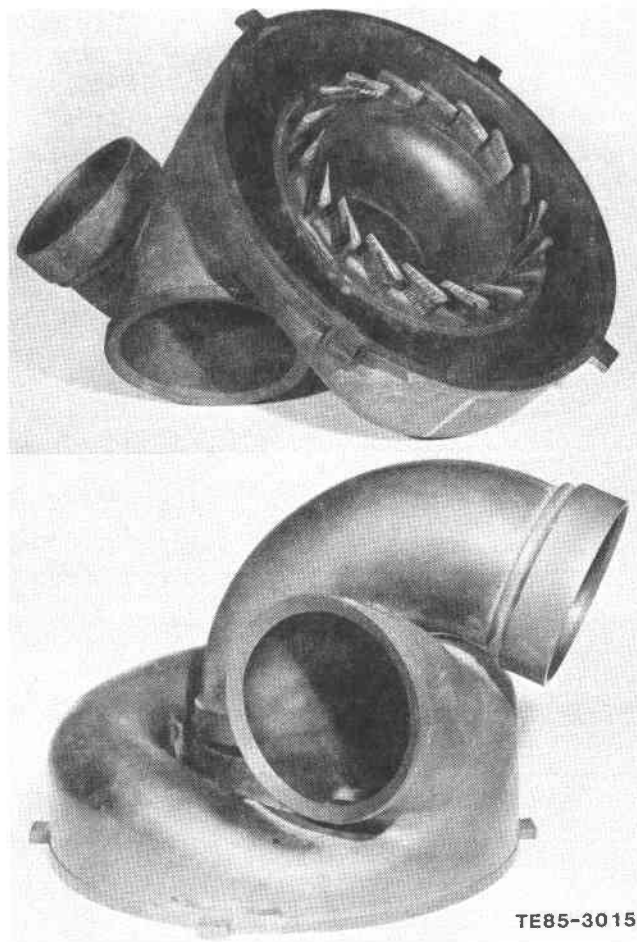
Finish-machined Carborundum alpha-SiC scroll assembly.
